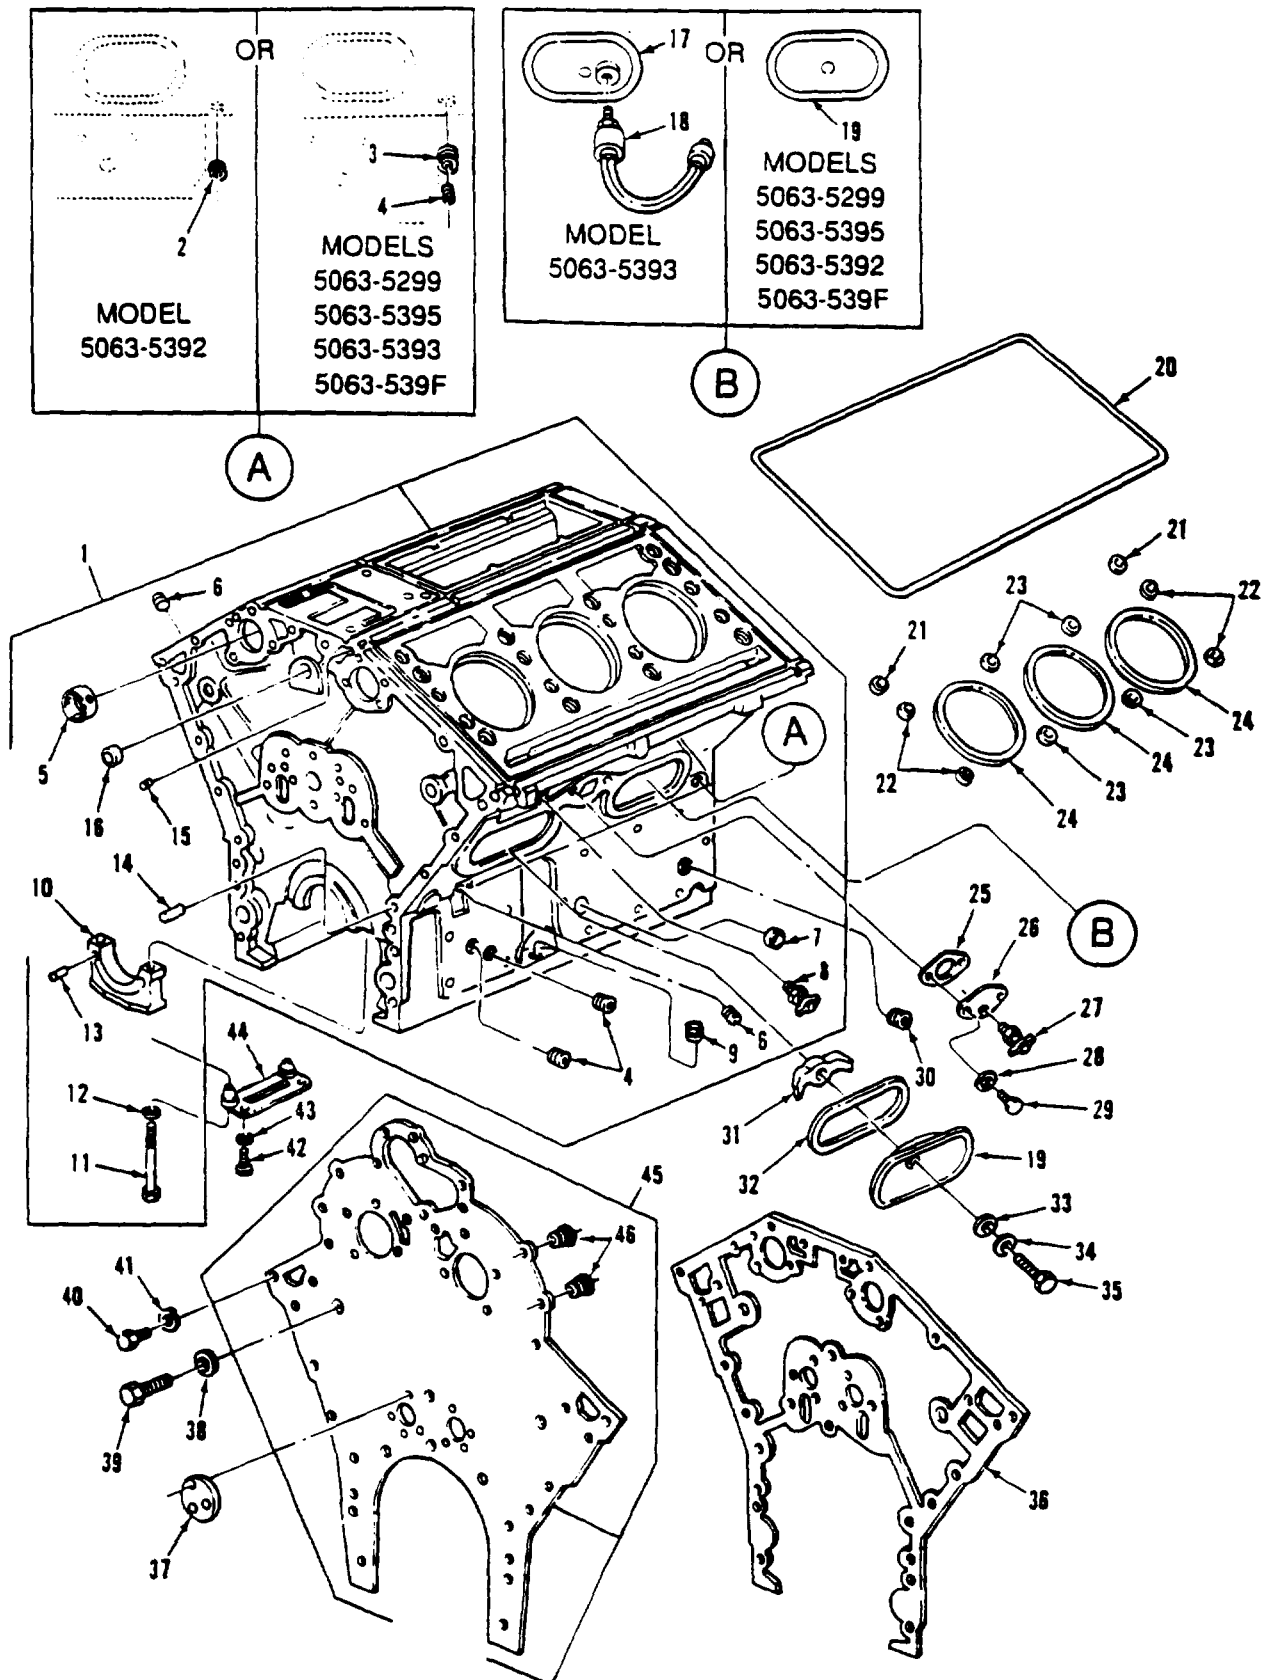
Cylinder Block Assembly, End Plate, and Related Parts
